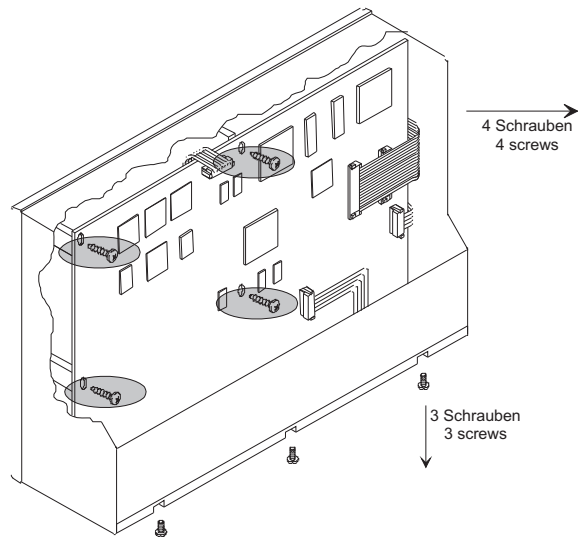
Unscrew and removal of main pcb and connector panel
